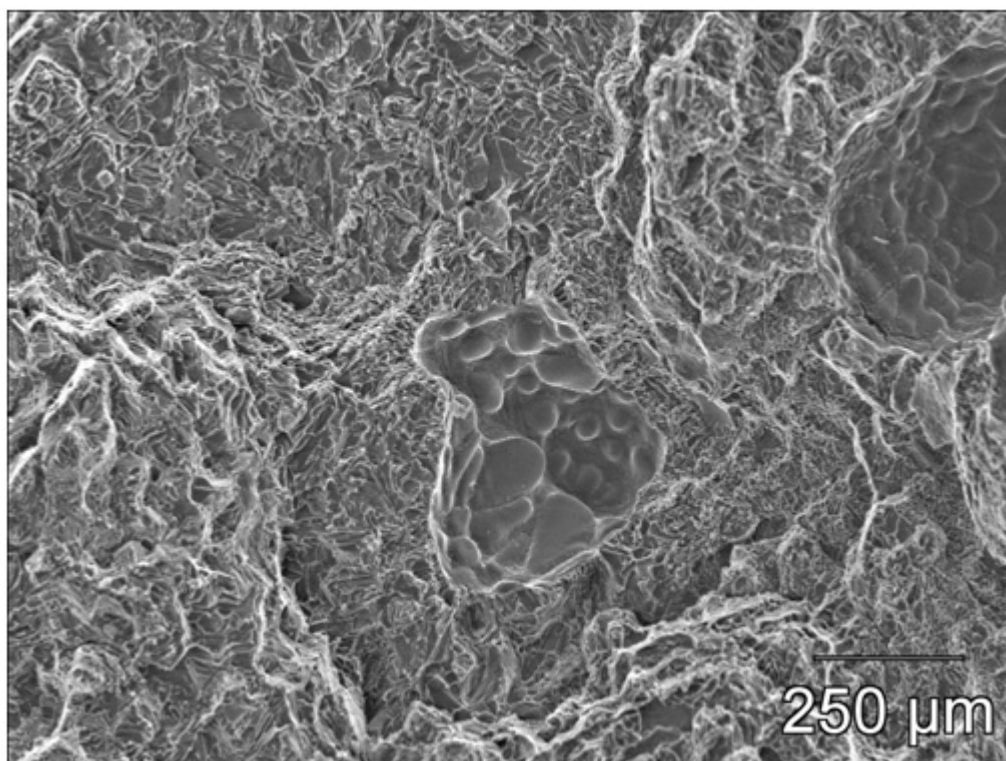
Fracture surface of as-cast 356-T7 tensile test specimen.
